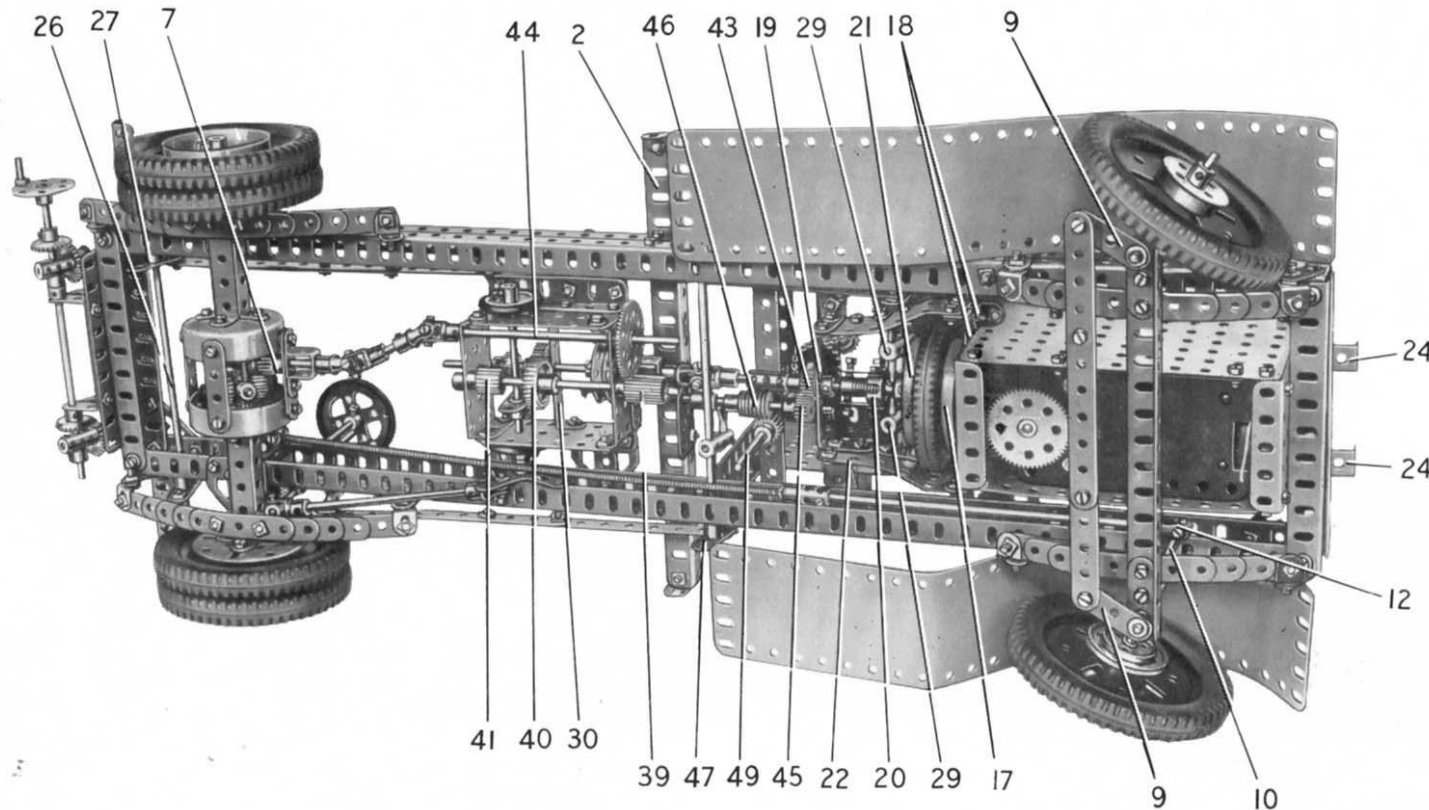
This underneath view of the Snow Loader chassis reveals the arrangement of the drive to the front wheels
